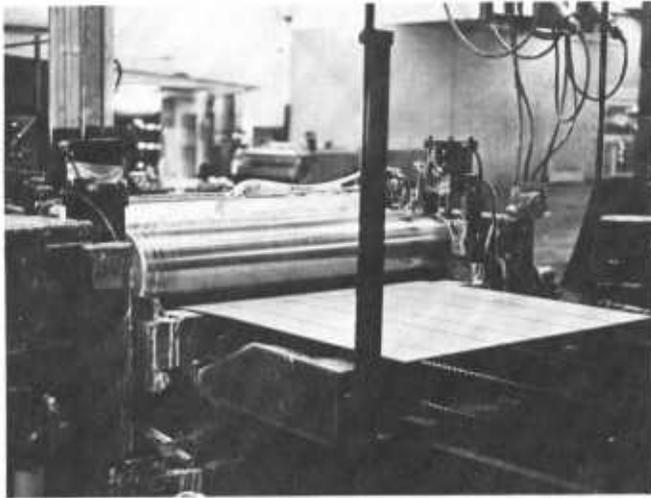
Outfeed end of reverse roll coater applying fill coat to grooved panel.
